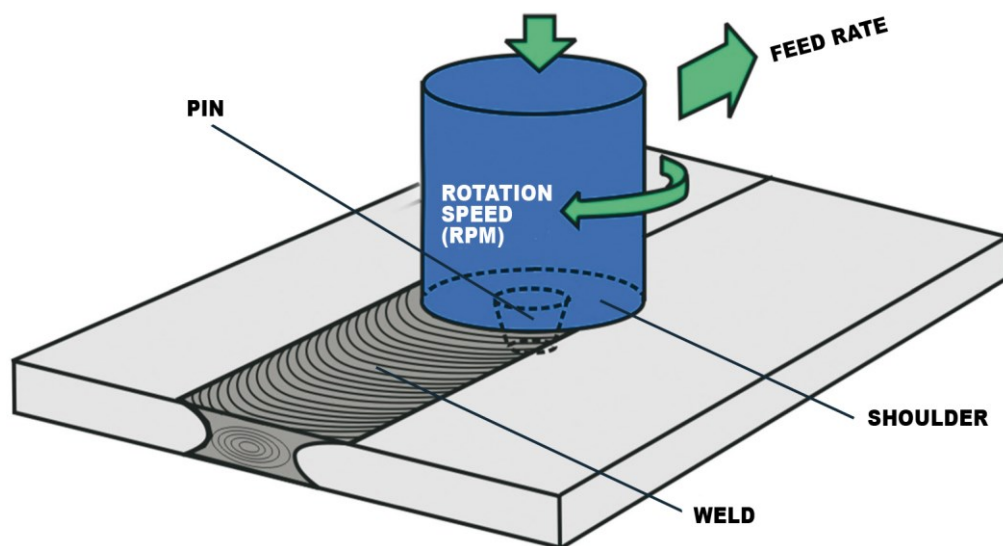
Diagram of a friction stir welding set-up. <http://www.uqac.ca/ceeuqac>
